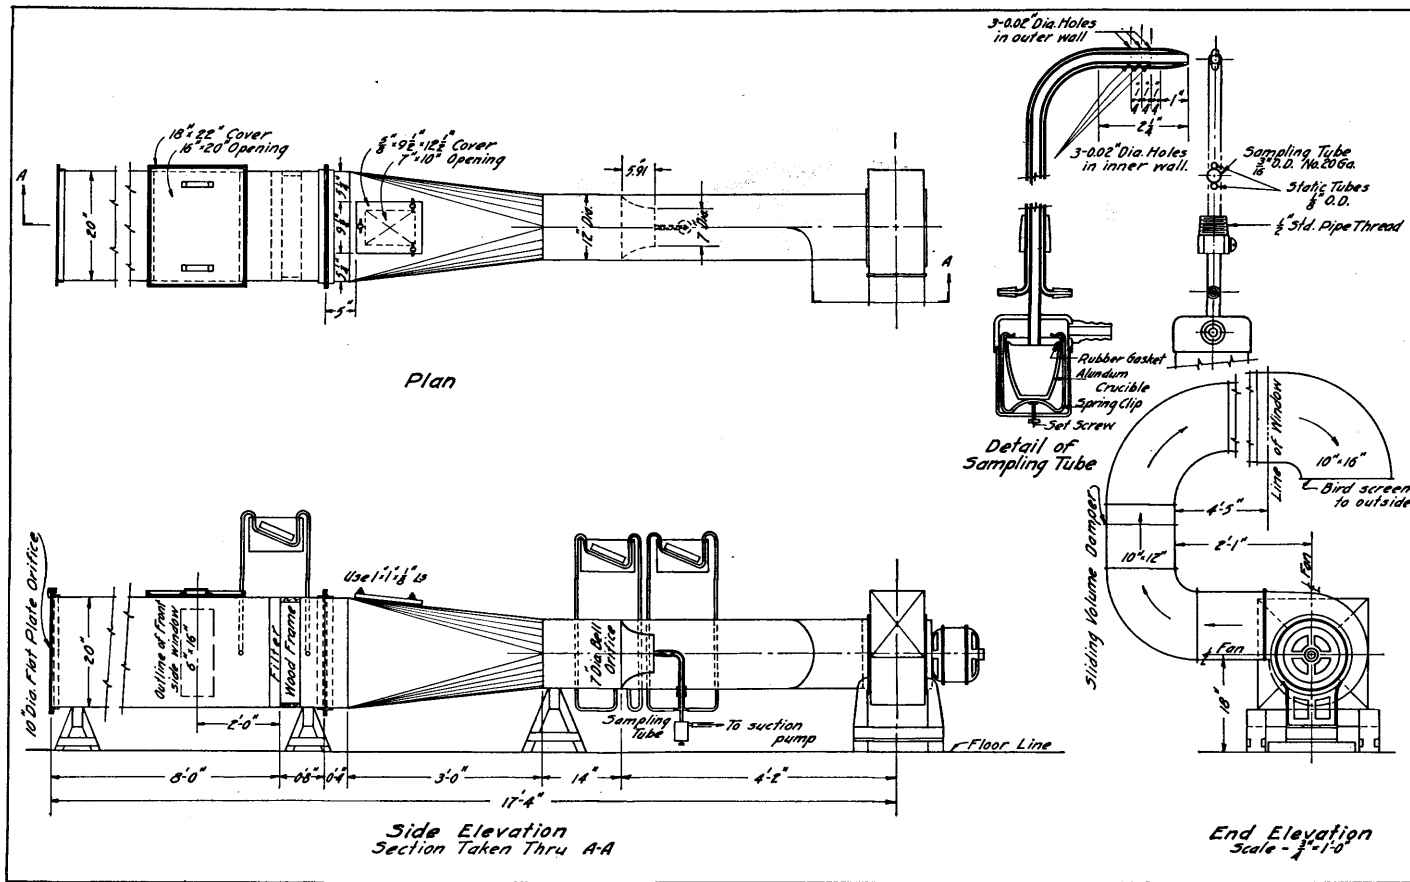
DETAIL DRAWING OF AIR FILTER TEST APPARATUS
